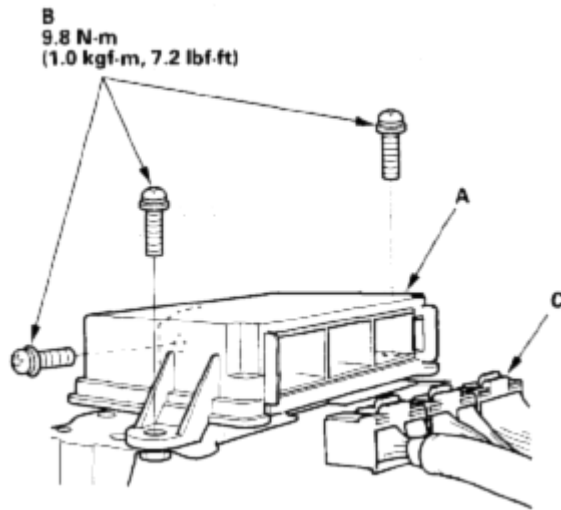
Identifying SRS Unit And SRS Unit Connectors
